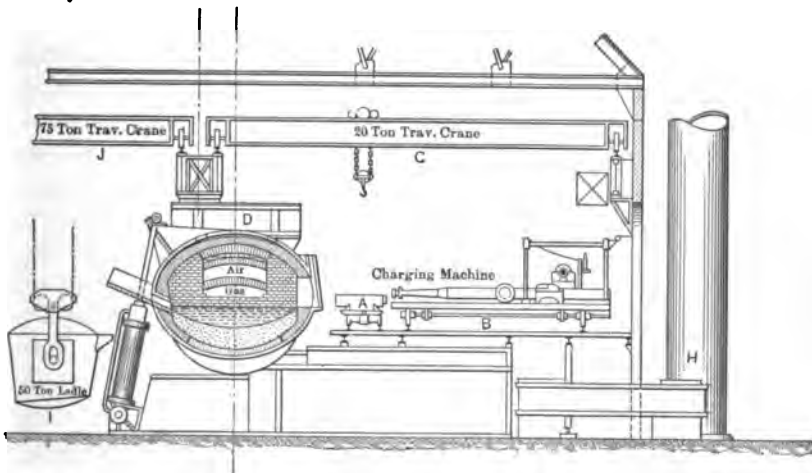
Section of Open-hearth Plant. Tilting Furnace.
